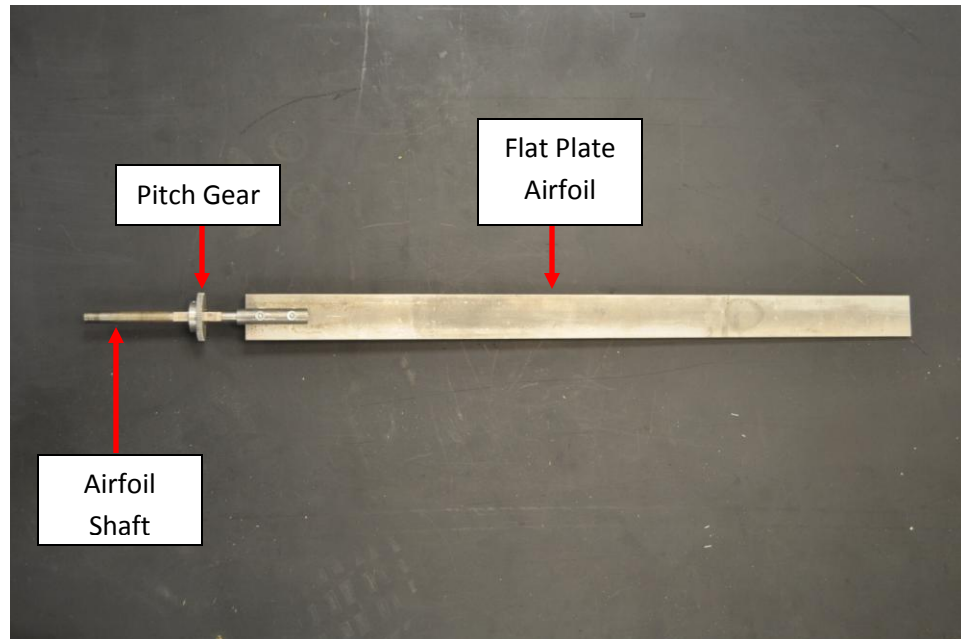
Airfoil Shaft with Airfoil and Pitch Gear Attached
